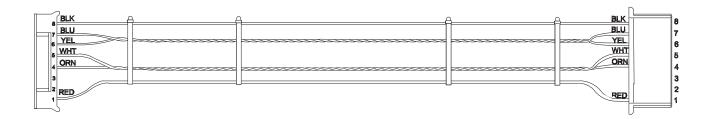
VLX3 Wash Display Link Cable Assembly
